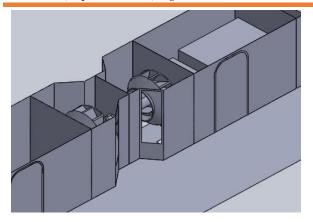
, Placement of machine, gearbox, impeller for lift, impeller for thrust and stand (isometric view)
